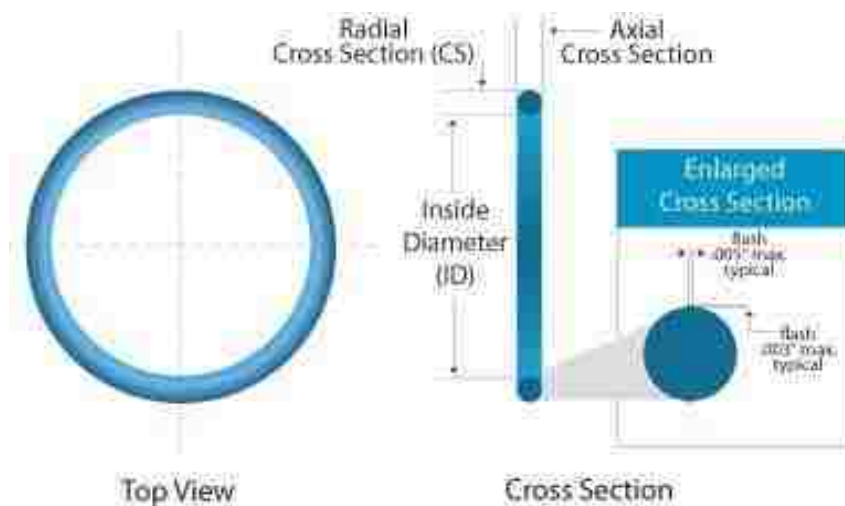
Drawing of the AS568 O-rings used in the bulge test die
